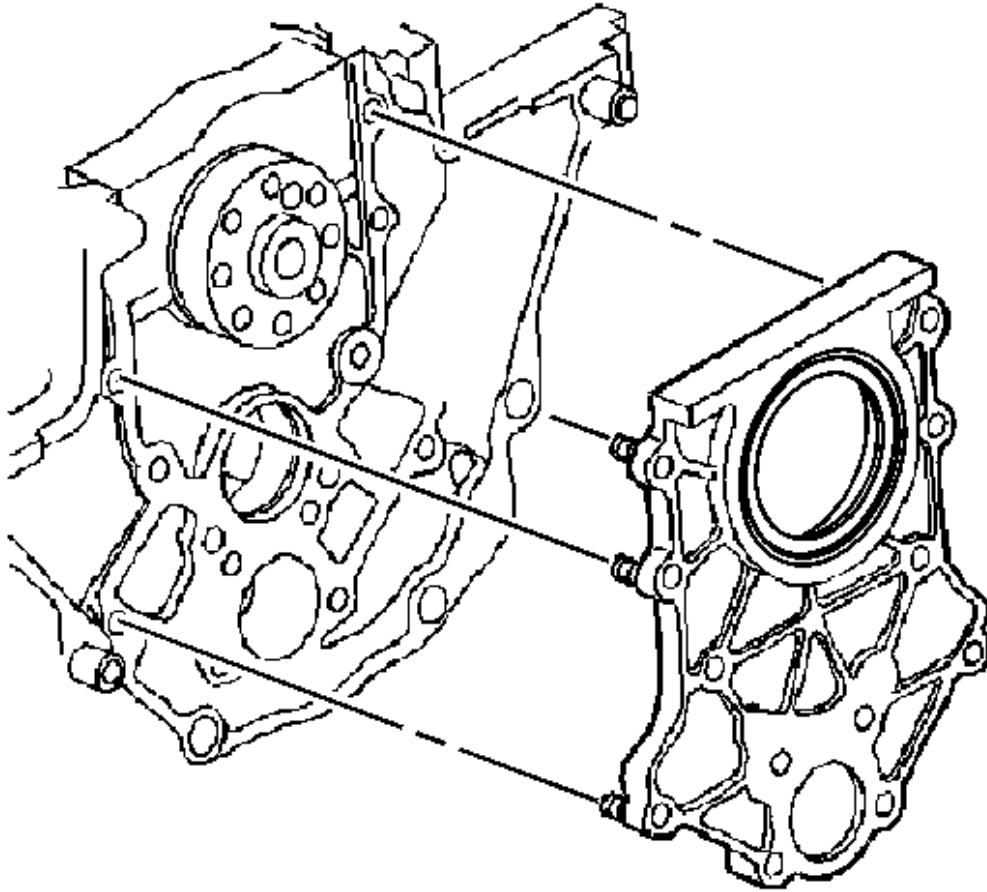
Locating Crankshaft Rear Oil Seal Housing
